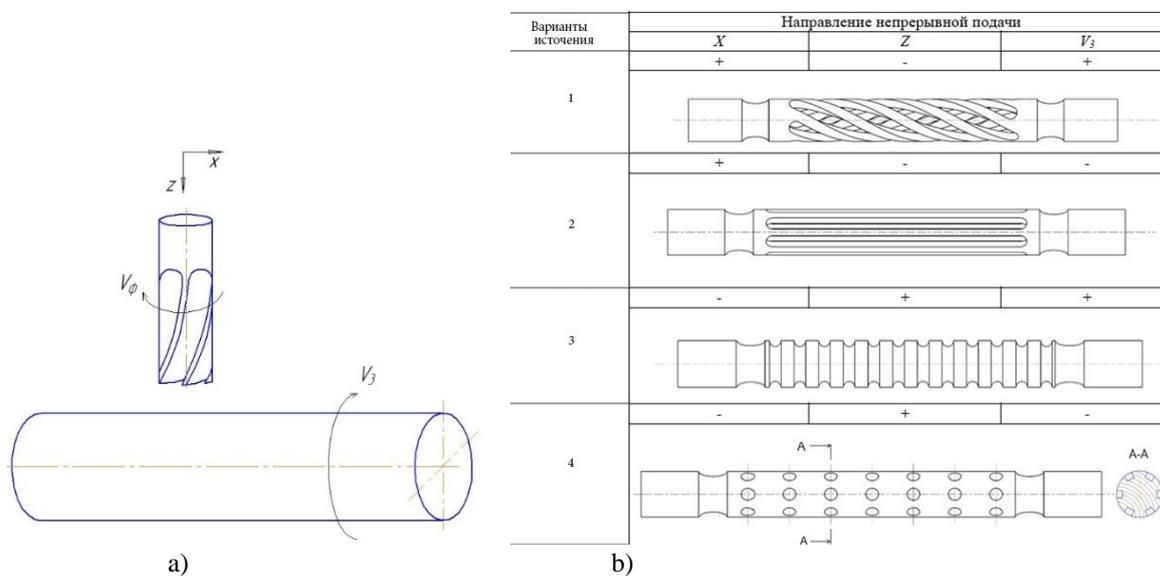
Scheme of processing workpieces on turn-milling machines (a) and implementation of balusters produced with different directions of the mill and workpiece continuous feed (b).
